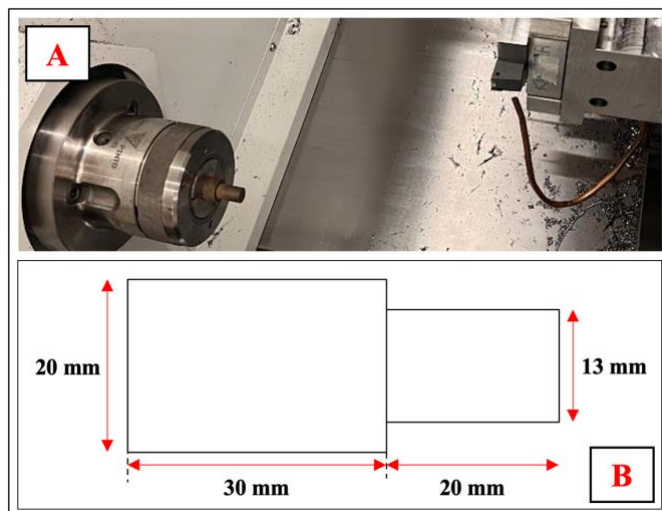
Picture of the experiment with the cutting tool fixed on the Kistler sensor (A) and the geometry of the cylinder with the machined area hatched (B)
